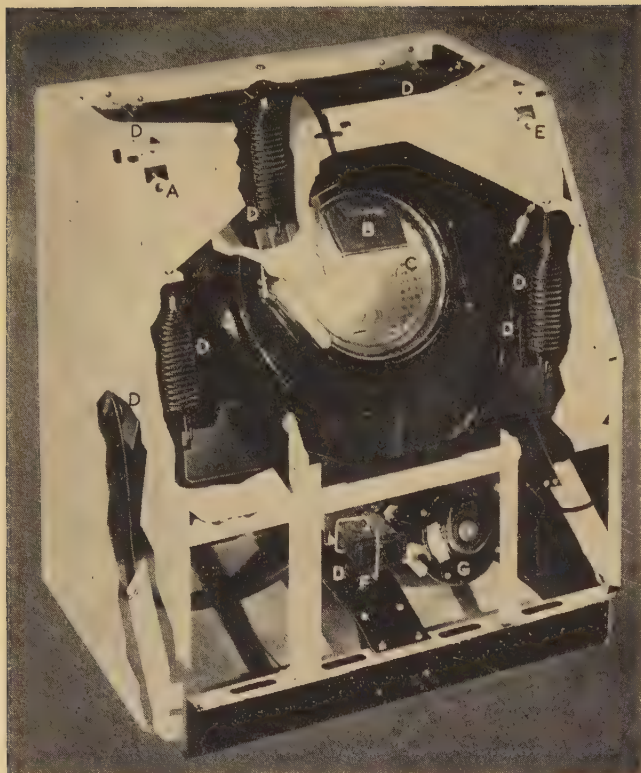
Cutaway view of Laundromat, with front and top covers removed
